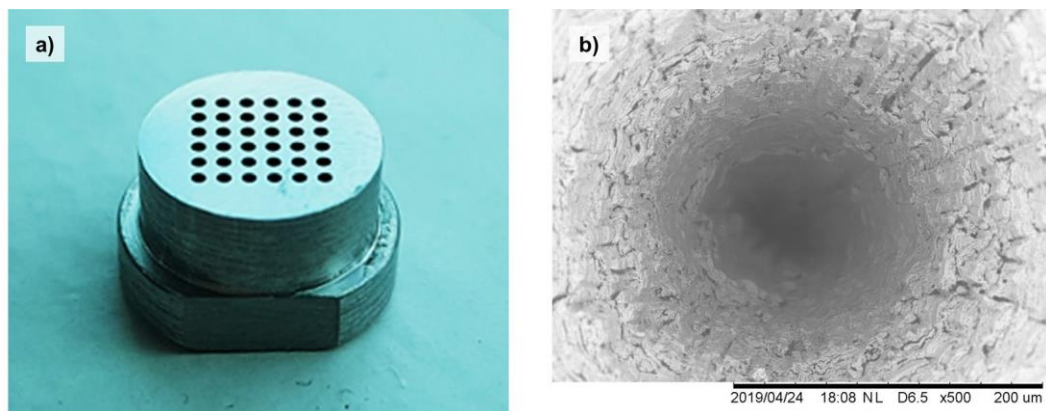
a) Laser machined mould insert, b) an SEM image showing the machining marks on the walls of a microneedle cavity.
